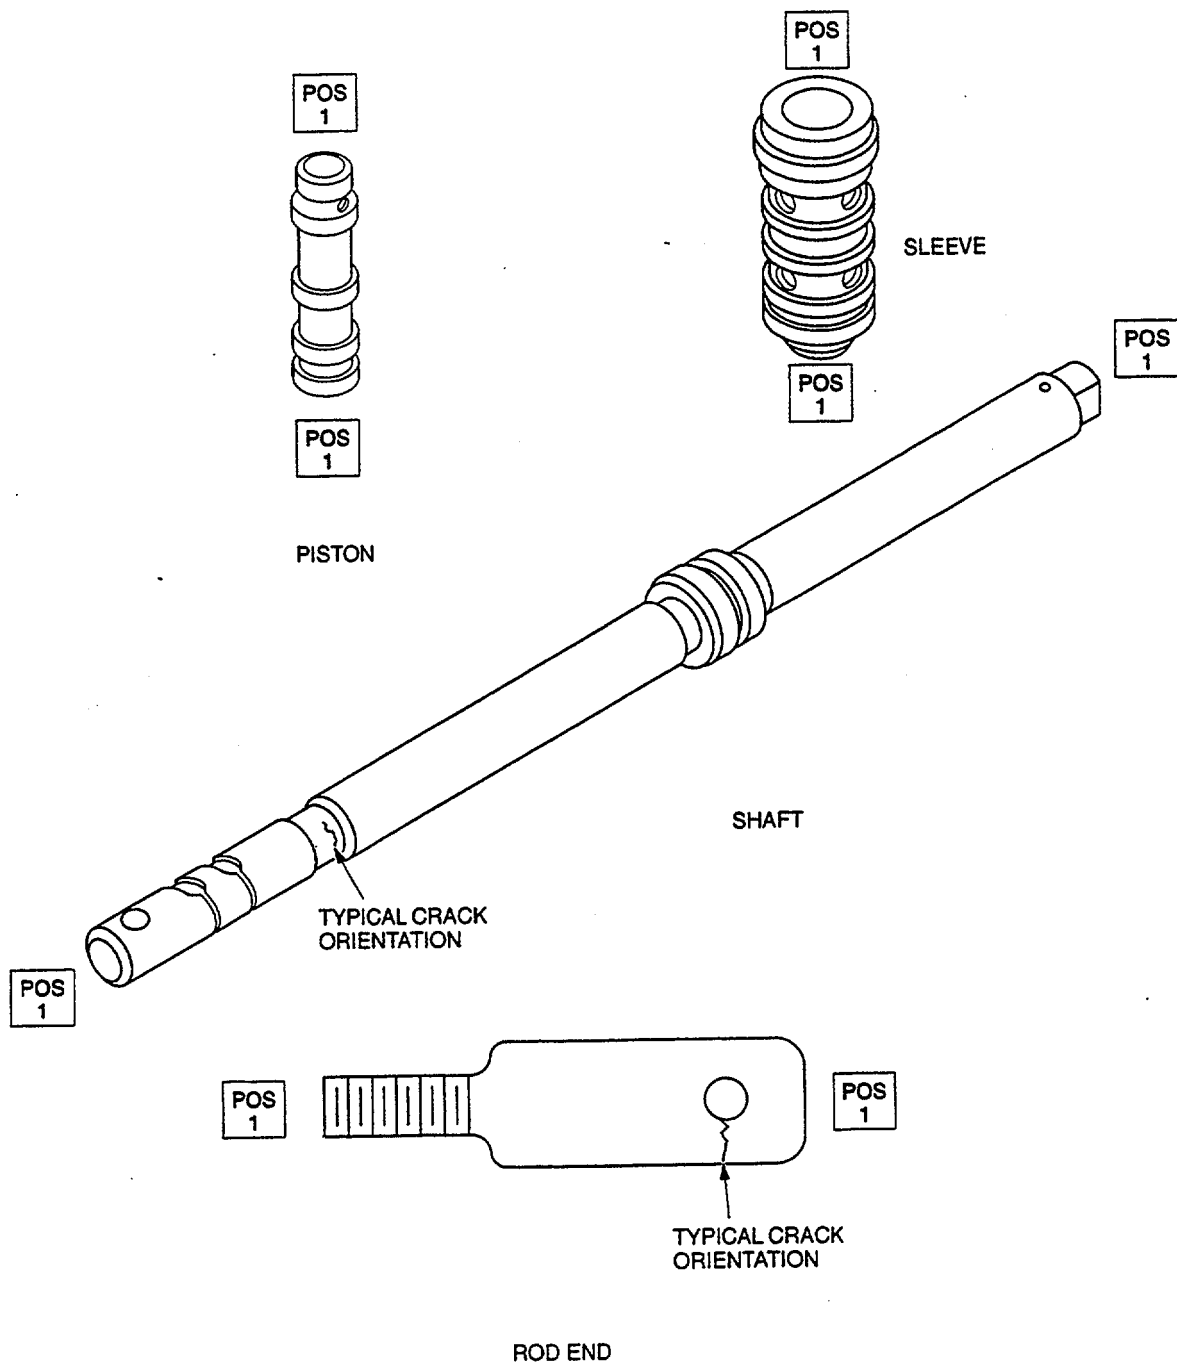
Rod Ends, Shafts, Pistons, and Sleeve
